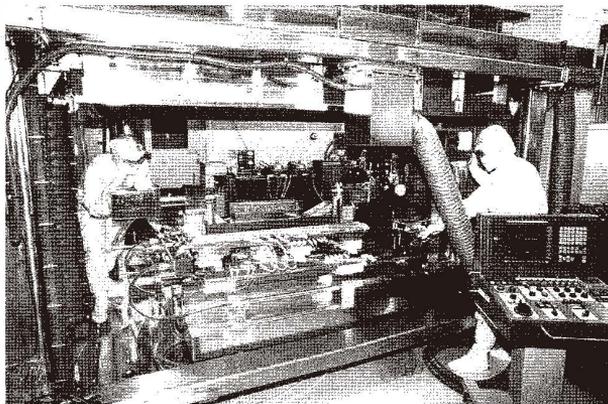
Photograph of NC EEM machine for toroidal-shape X-ray mirrors.
